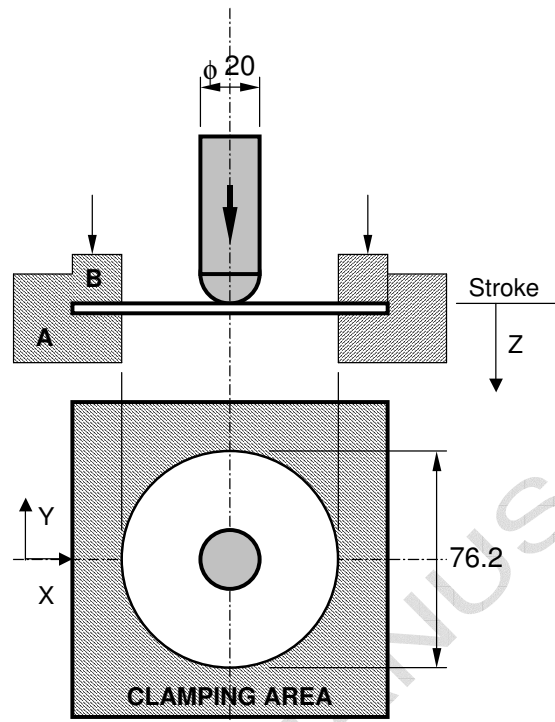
Testing fixture for impact testing (dimensions are in mm).
